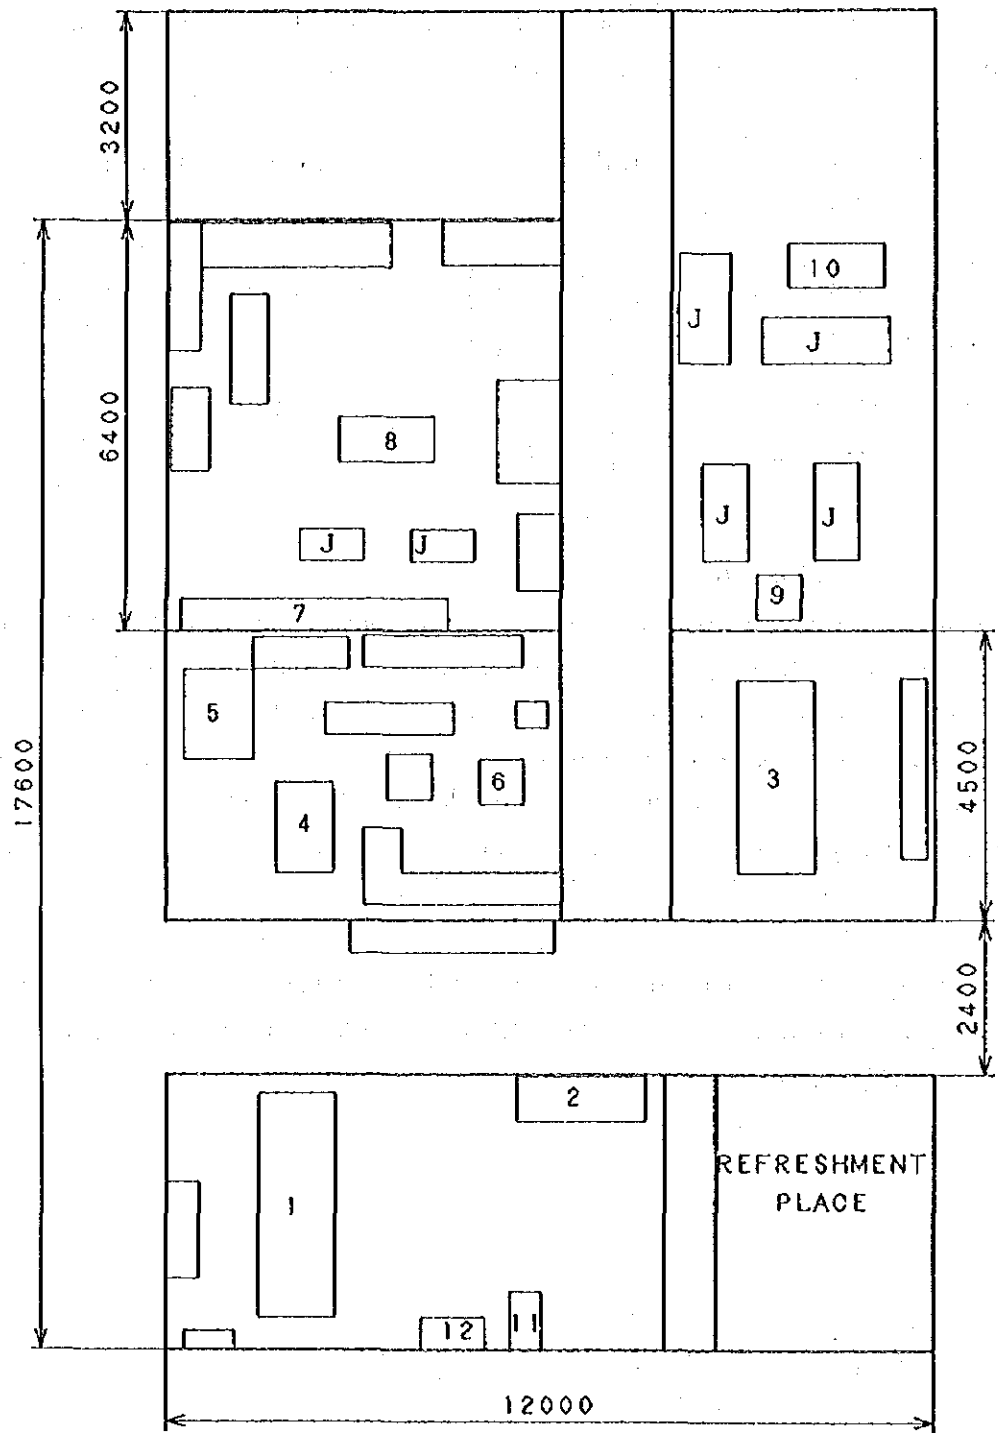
Layout Drawing of the Welding Process for Rear Seat Cushions for Passenger Cars
